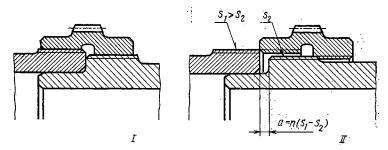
Connecting tubular parts with nut having threads different in pitch and diameter
